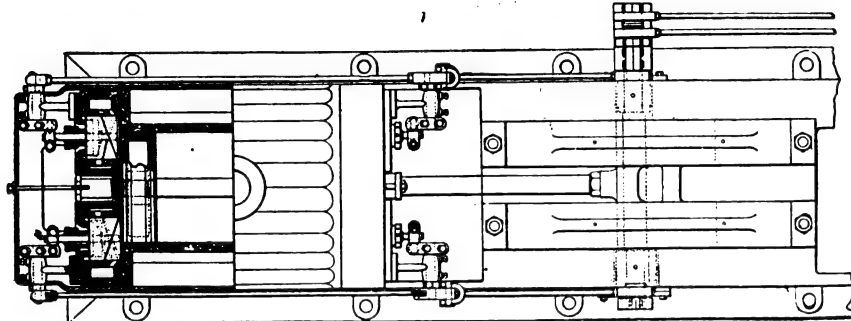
"END-CYLINDER" ROTARY CUT-OFF PISTON VALVES.
